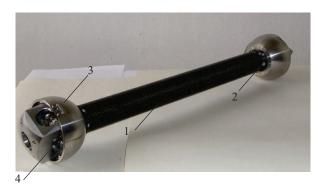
Manipulator rod with spherical supports mounted at its ends: 1 – tube; 2 – screws; 3 – housings; 4 – casings of the supports
